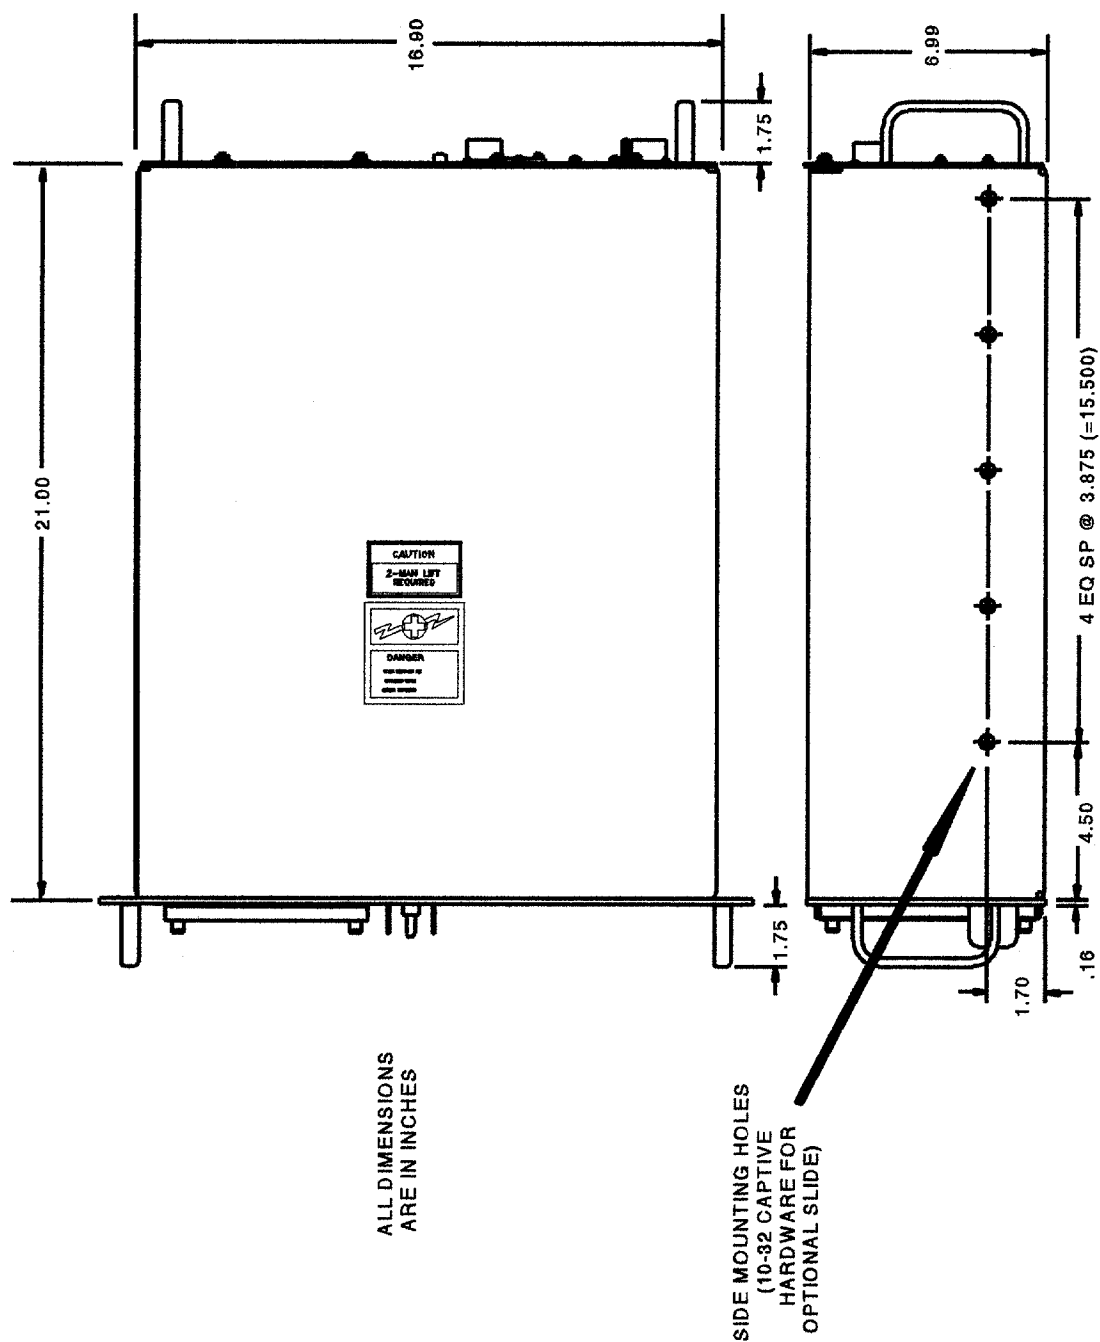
GUPS 1250A (Top and Side View) Mounting Dimensions
